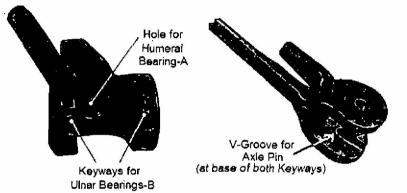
Humeral Component, design features for mating to bearings and axle-pin
